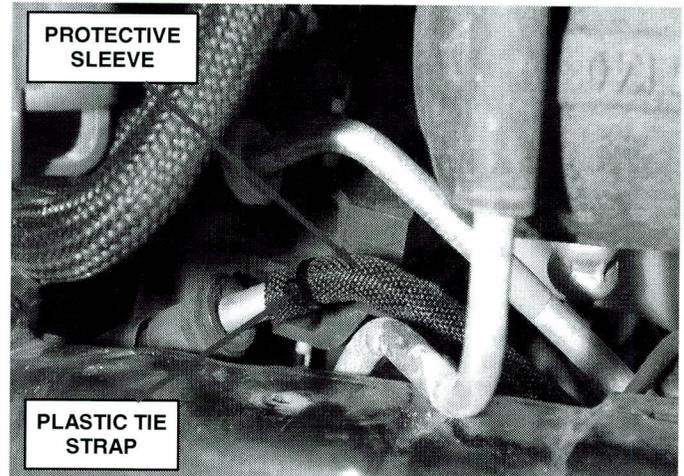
Inspect Transmission Oil Cooler Tube for Wear Marks at the Wire Harness
